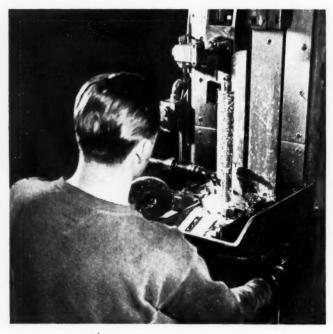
The Piece to be Flanged, Blanked from Strip Stock, is Placed in an American Broaching Machine, which Enlarges and Smooths the Holes
